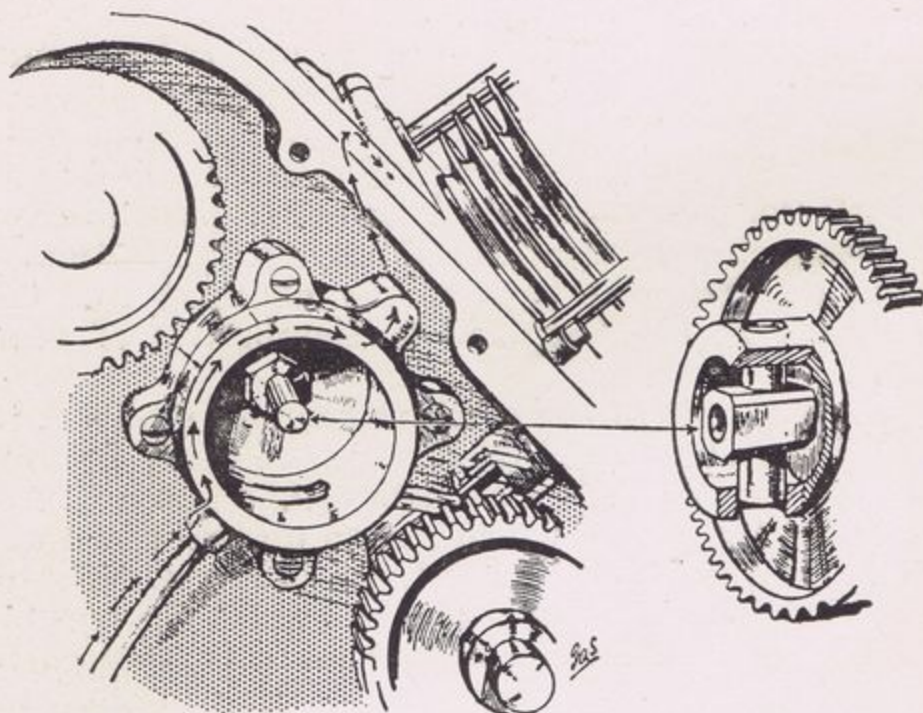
SHOWING DRIVE OF ROTARY OIL PUMP
